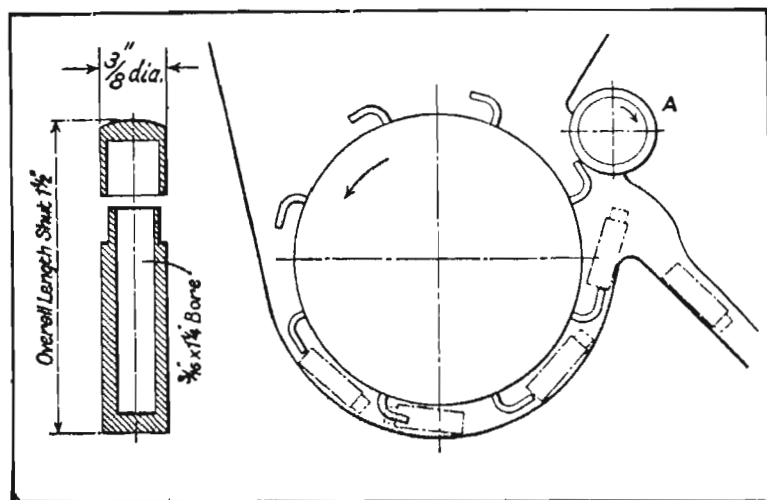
(Left) Molded Box for Holding Pencil Leads. (Right) Mechanism for Feeding Boxes Open End Forward.
